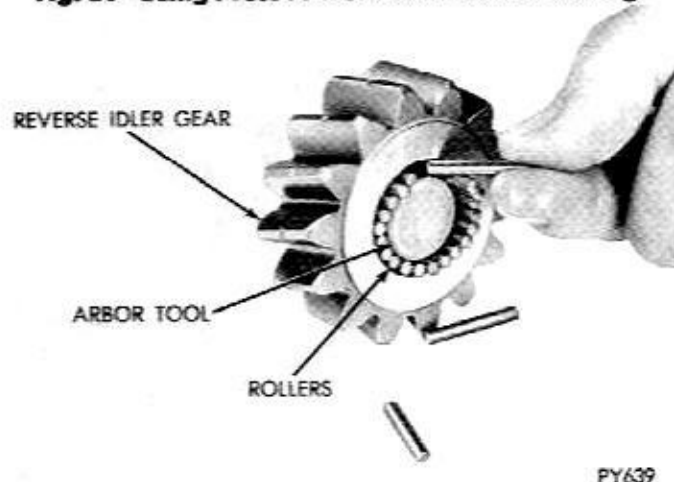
Reverse Idler Gear—Roller and Arbor Assembly
